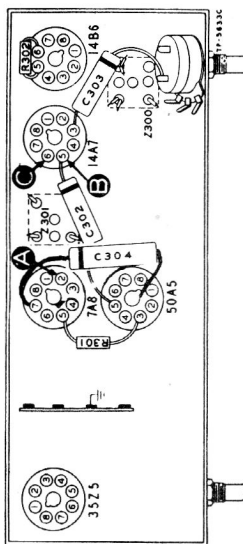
BOTTOM VIEW, SHOWING SECTION 3 TEST POINTS
